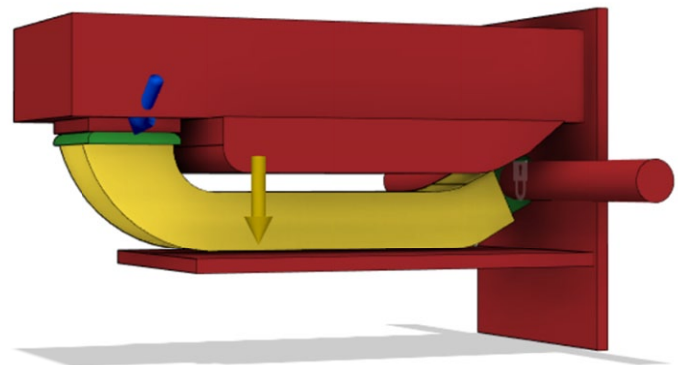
CAD model with preserve geometry, obstacle geometry and starting shape
